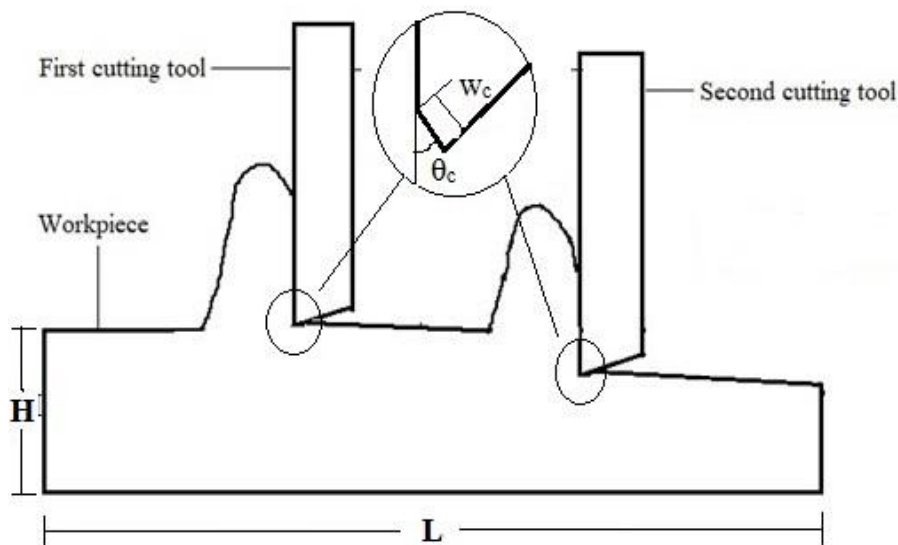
Schematic view of simultaneous turning process with chamfered cutting tool
